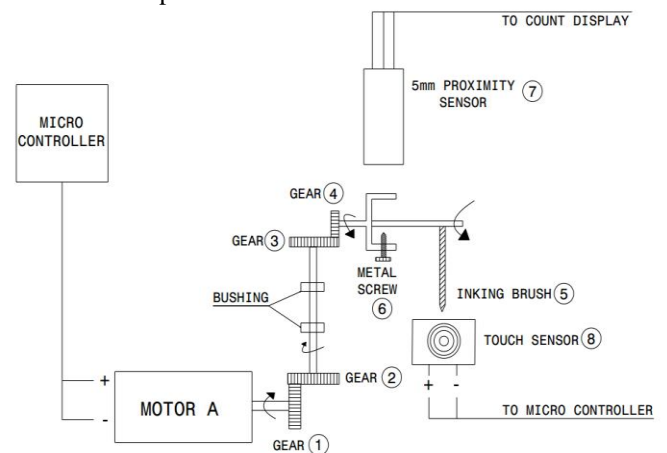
CAD Model of the Inking Brush Assembly developed in CATIA V5 CAD tool.
